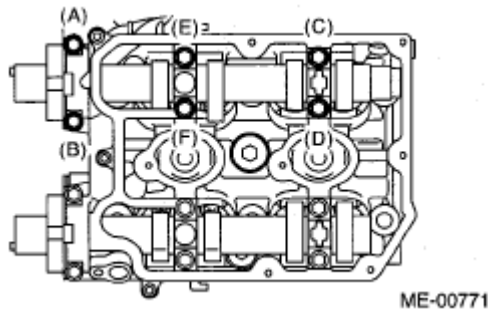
Identifying Camshaft Cap Bolts Alphabetical Sequence
